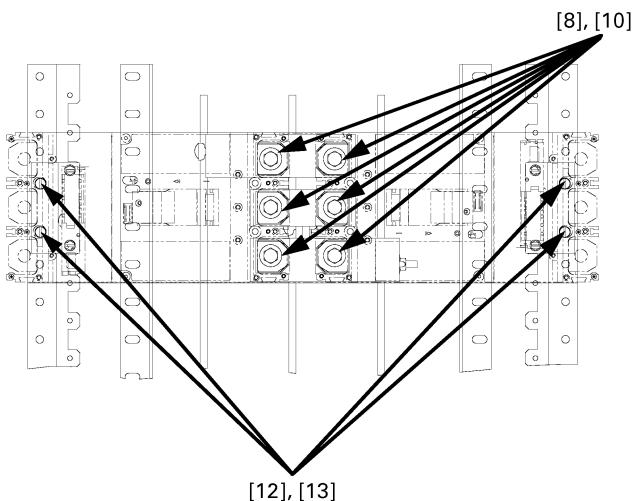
Installing the circuit breakers on the mounting brackets and strap blocks.
